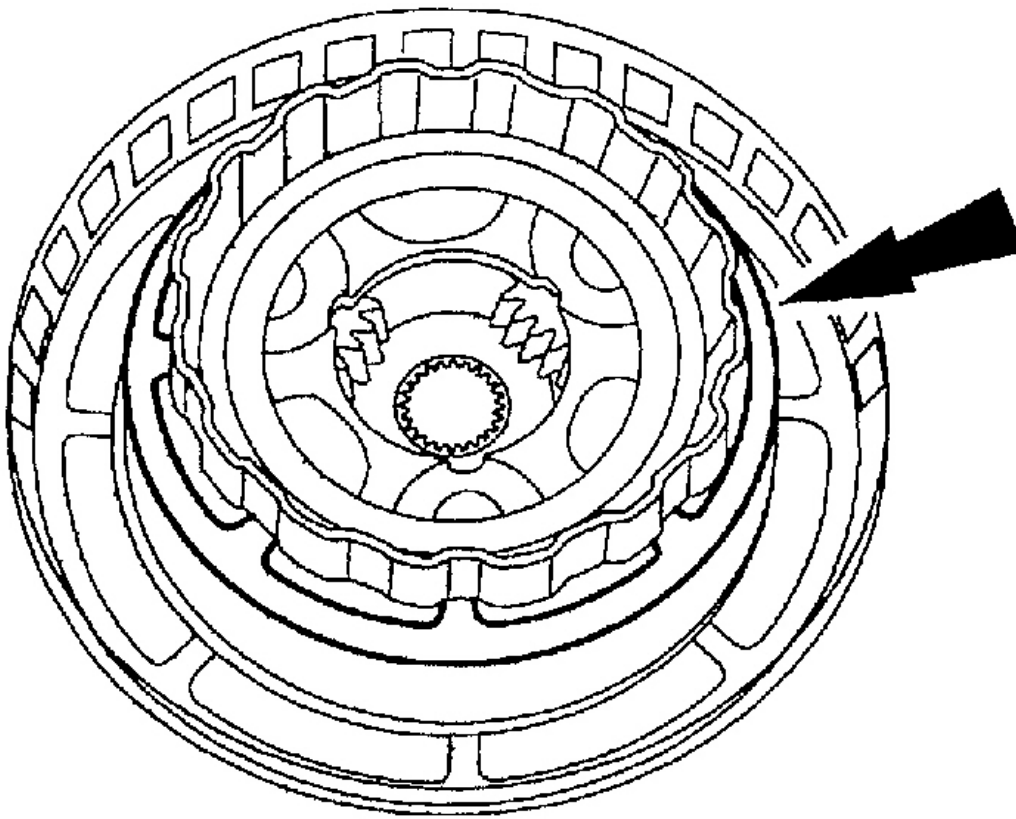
Removing Center Shaft From Overdrive Ring Gear
